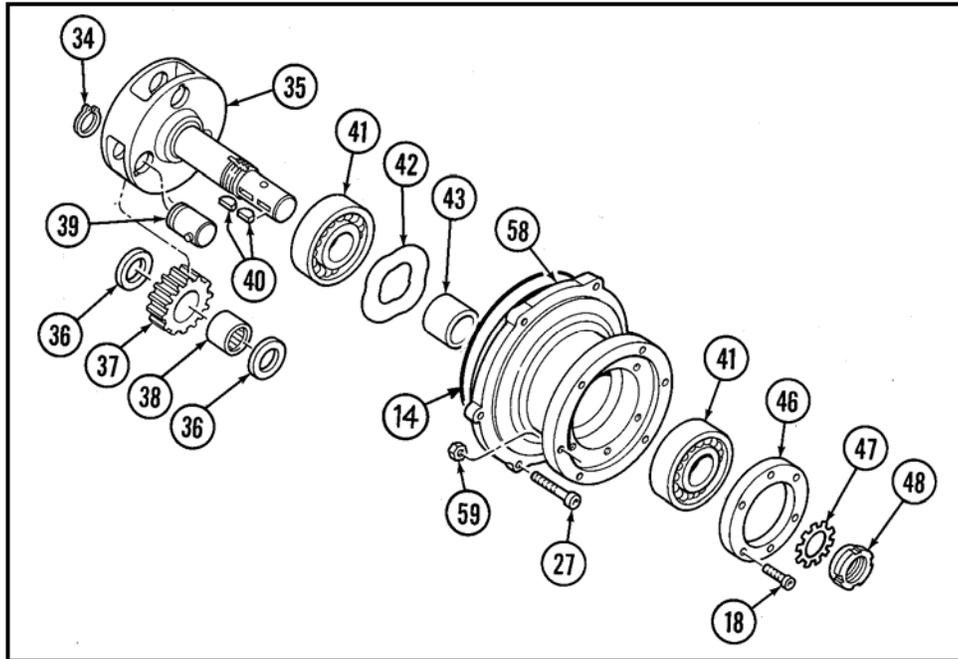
Gearbox Housing Assembly (T112B/T121B/T109P/T115P)
